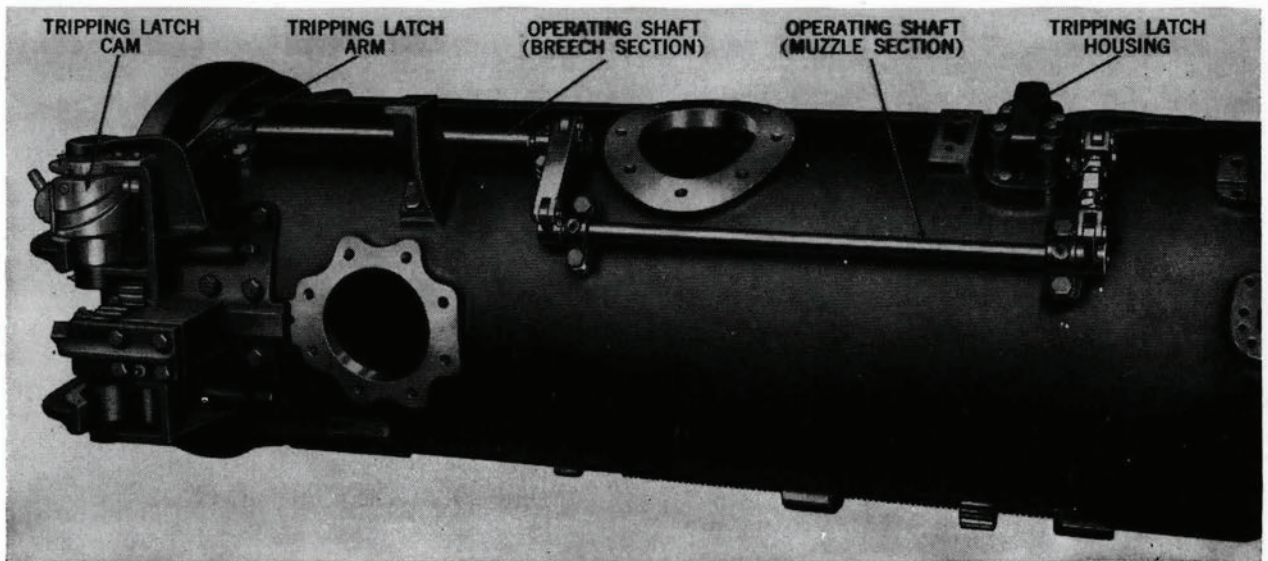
Linkage From Tripping Latch Cam to Tripping Latch Housing.
